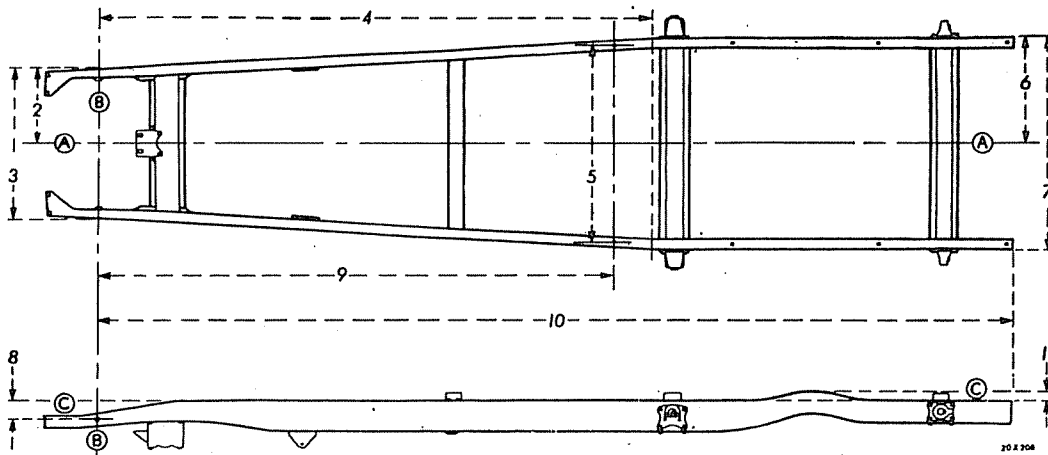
Frame Alignment (Dimensions given in inches) 108 inch Wheel Base shown above.
